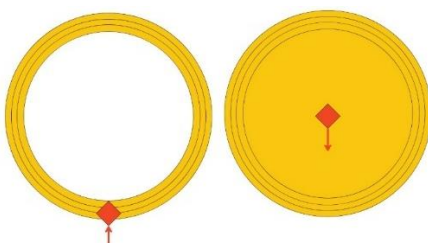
(a) Cutting operation with tool being fed inwards; (b) Cutting operation with tool fed from center.
